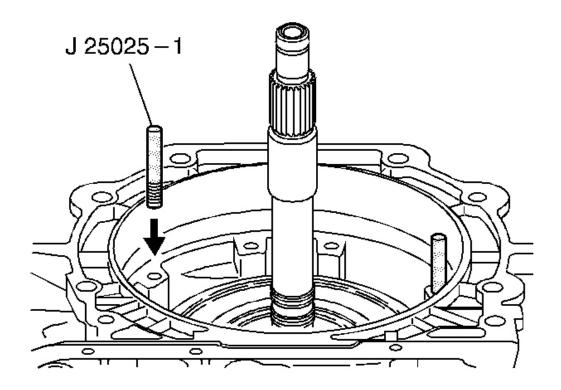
Identifying Special Tool J 25025-1 Courtesy of GENERAL MOTORS CORP.
